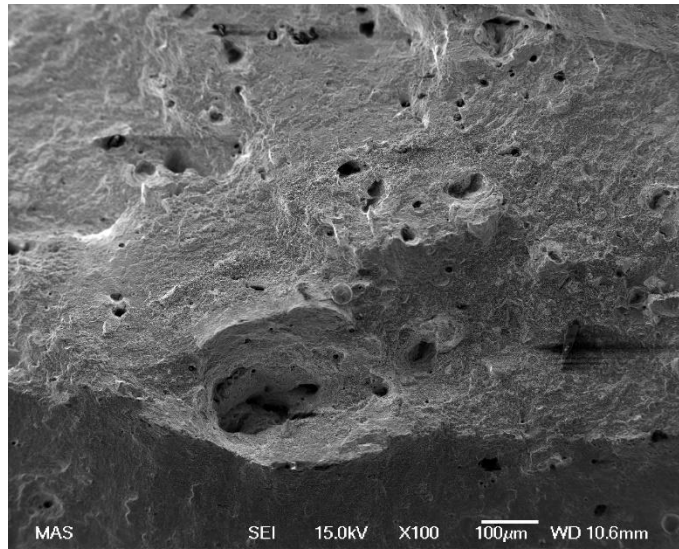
97: BP3 HT2 Fracture Surface
